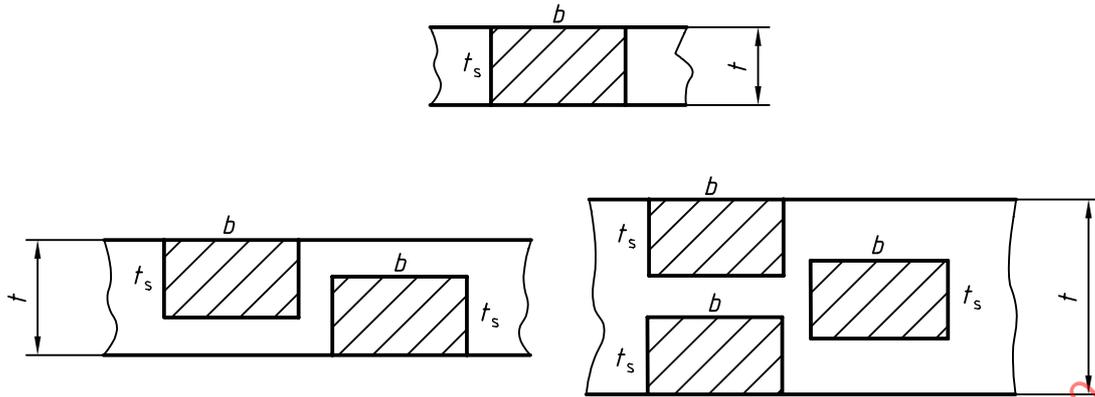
Root and face bend test specimens for a butt weld (RBB and FBB)
